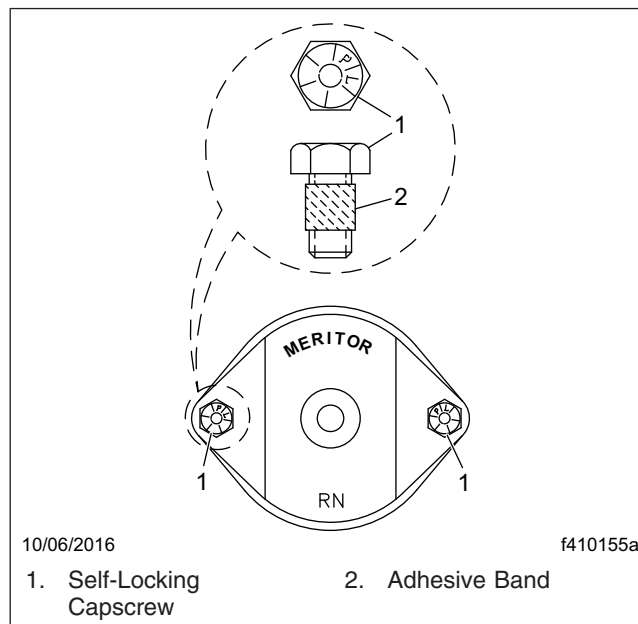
, Meritor U-Joint Fasteners for Bearing Caps
